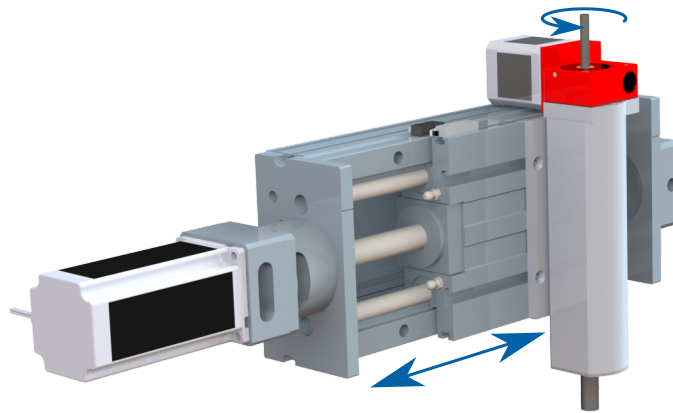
Rendered image of one of the movement stages. The linear stage is driven by the T23 stepper motor. The rotation axis is driven by the CTP12 stepper motor through a 10:1, right angle gearbox and is supported by the bearing tube. Movements are shown by blue arrows.
